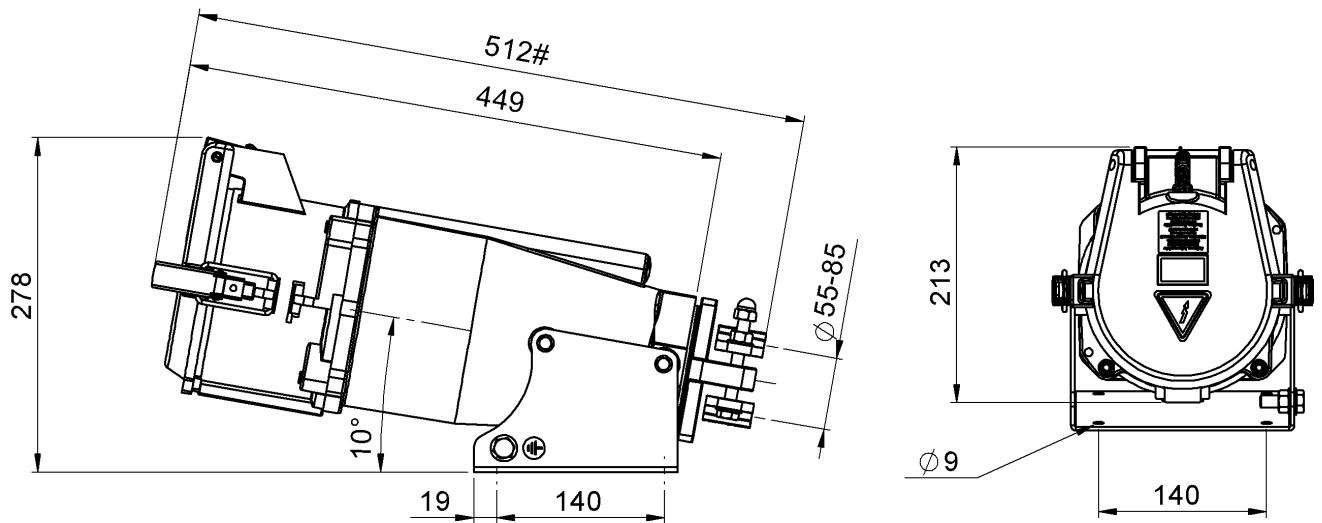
Dimensions Female Connector Wall FCW A-Line (500 A – 600 A) in mm
